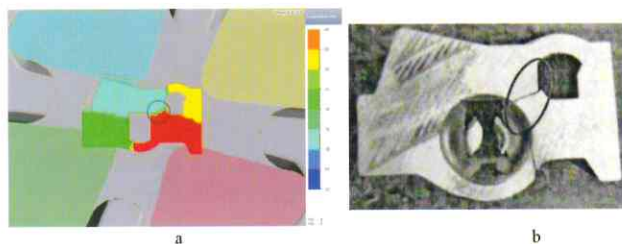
Location of the seam welds in the hollow profile shown by merging colors in simulation (a) and the crack along the seam weld in the wedge test shown by the oval (b).
